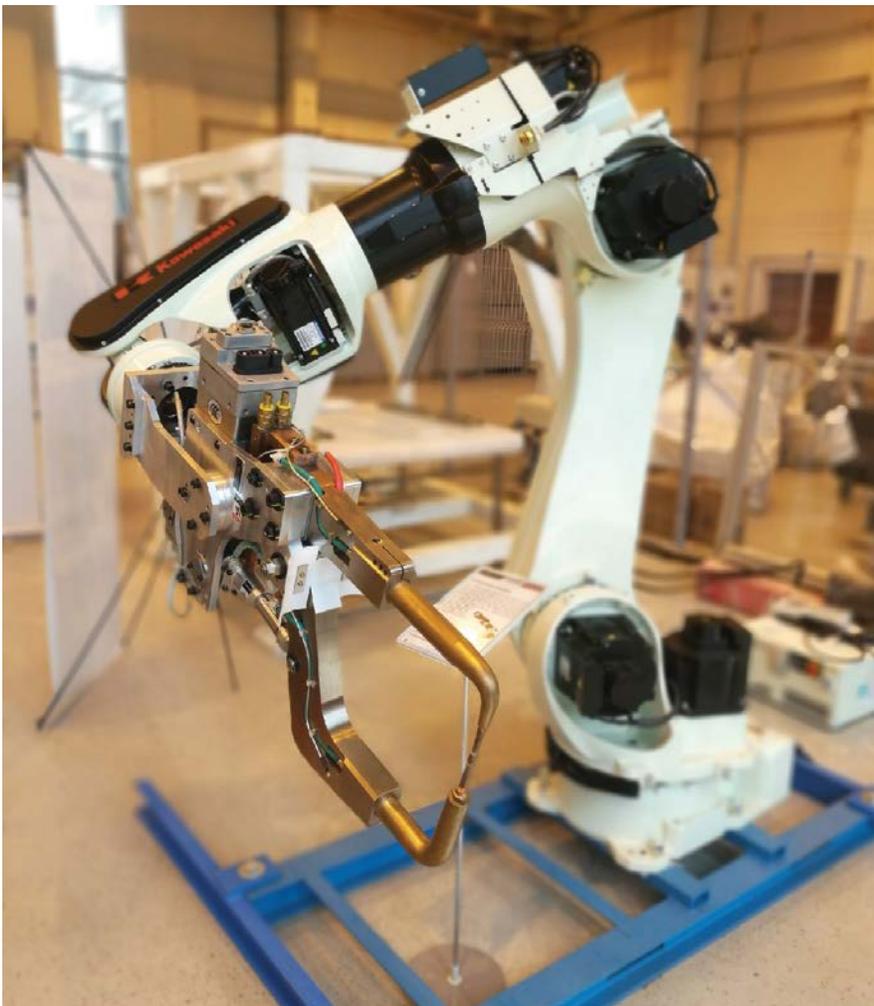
Industrial robots, like this Kawasaki Spot-Welding Robot, are sizable investments, presenting a potential barrier to widespread industrial robot use. © Mukszwei (cc by-sa)
